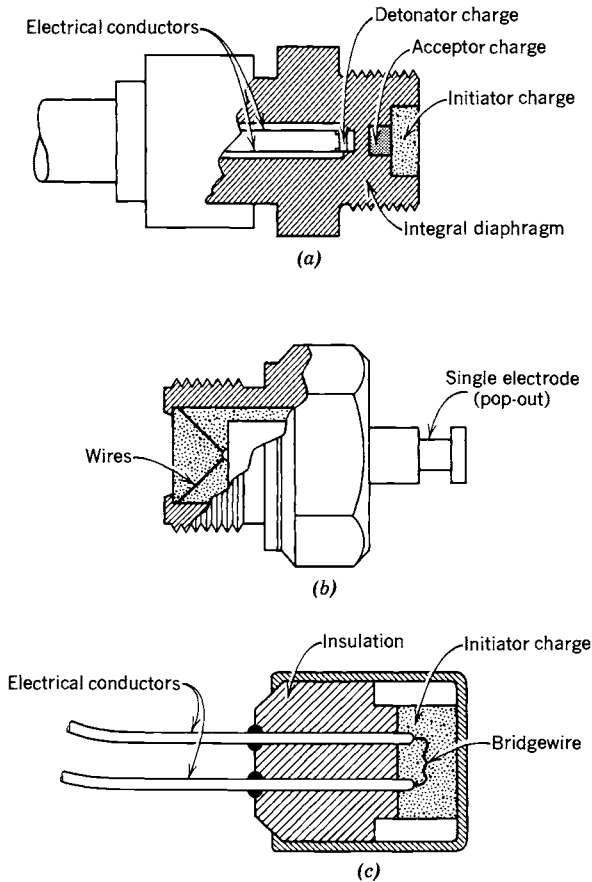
Typical electric initiators; (a) integral diaphragm type; (b) header type with double bridgewire; (c) exploding bridgewire type.
